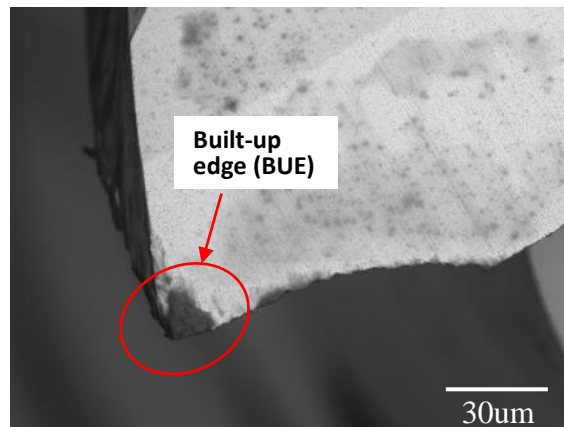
Built-up edge formed on cutting edge corner at Tool #3 (cutting speed of 125.6m/min, feed per tooth of 3 μm and depth of cut of 100 μm)
